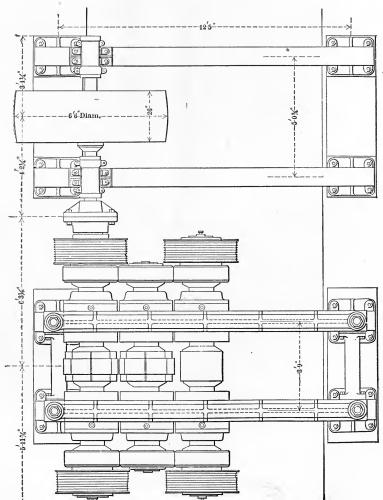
View looking down between 5-foot rolls, Edison plant. (Engineering News.)
